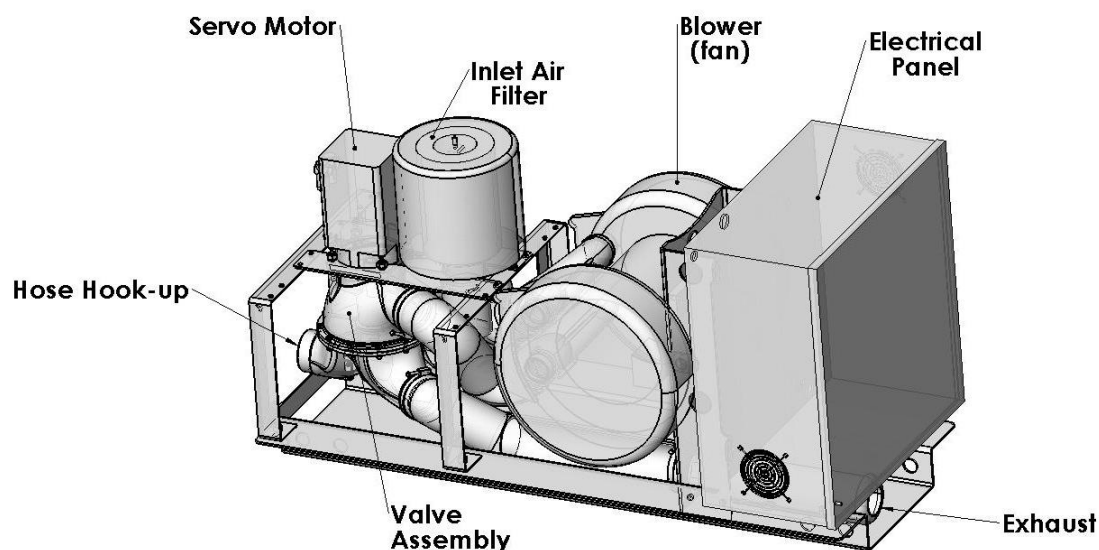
Three-dimensional assembly drawing of the Pressure Loading Actuator (PLA)
